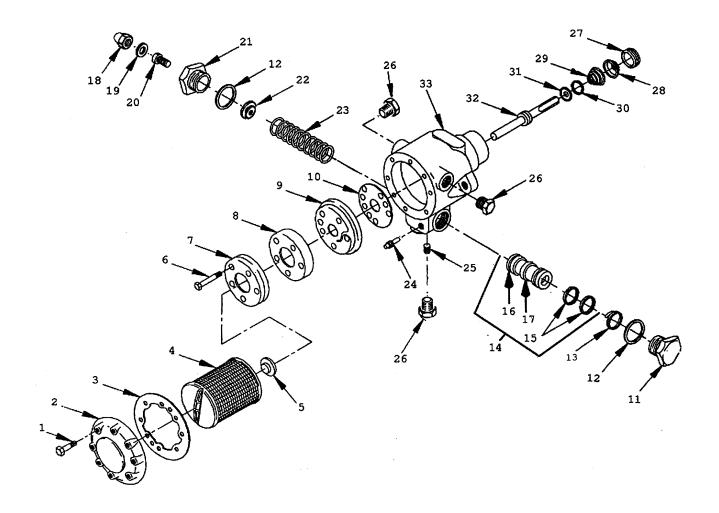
FUEL PUMP ASSEMBLY (MODEL M85)
